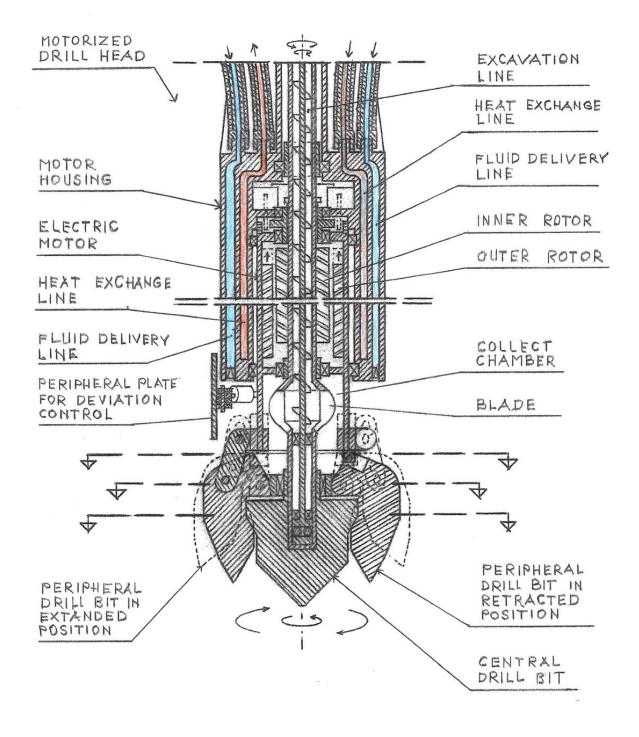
Cross-sectional View of the Motorized Drill Head for Drilling Faster, Deeper, and Wider Wellbore
